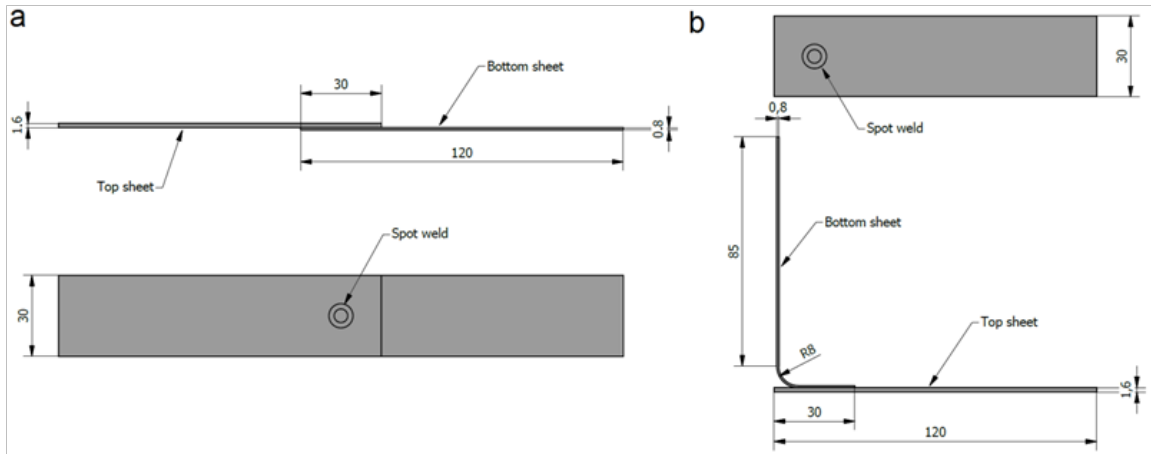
Configuration and dimensions of test specimens: (a) tensile/shear test specimen and (b) peel test specimen
